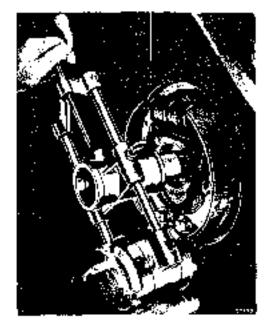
Grinding Brake Shoe Focing With Tool MT-29 (1936-42 Models)
